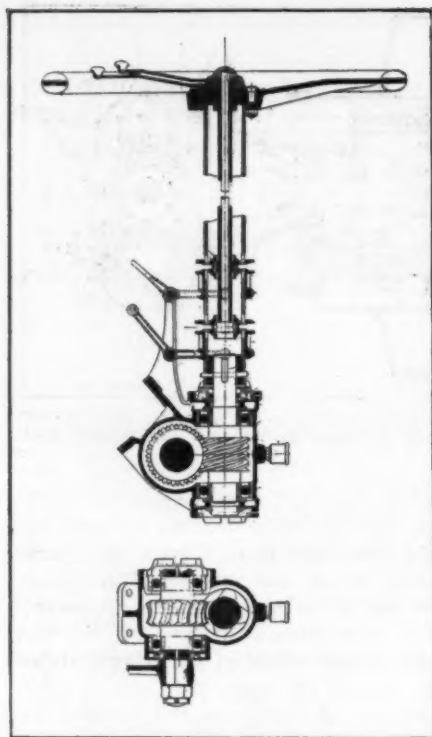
Section of the steering post, showing a worm and gear mounted on annular type ball bearings with thrust ball bearings to take the work in the other plane
